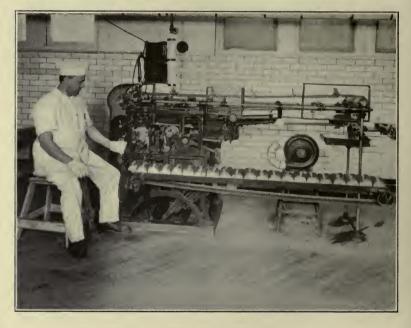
Machine for Wrapping Bread with Paraffin Paper. (Courtesy of Ward Baking Co.)
